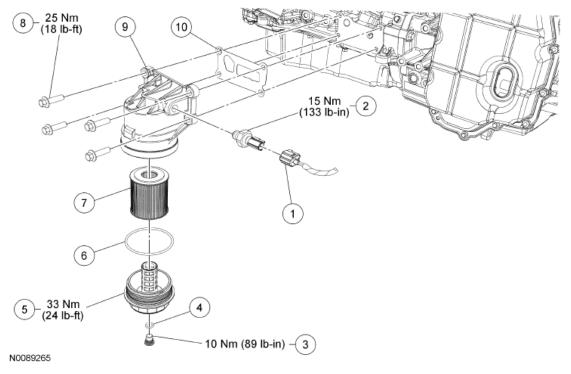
Identifying Oil Filter Adapter, Oil Filter Element And Engine Oil Pressure Switch
